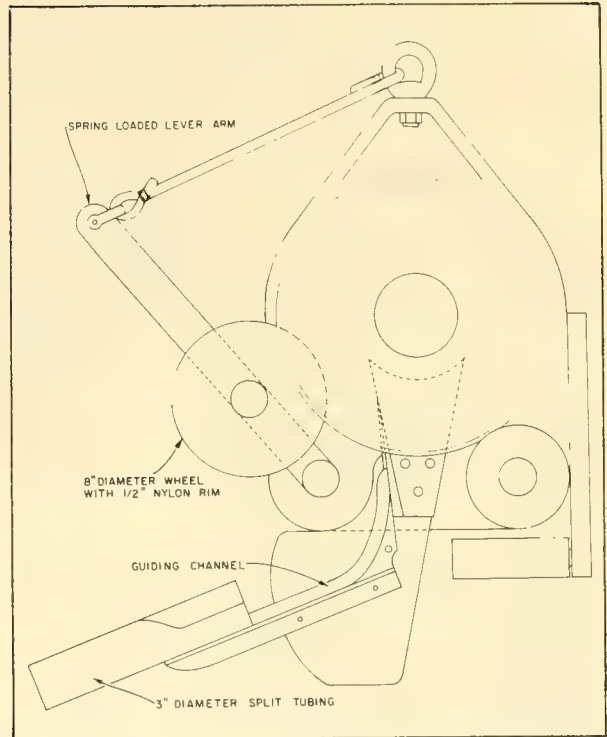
Crab block with spring-loaded wheel to hold line in the sheave.
